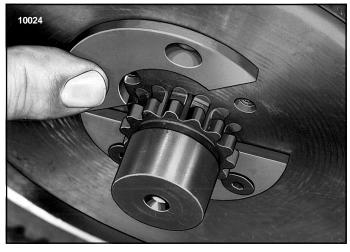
Installing Retainer Plates on Load Brake Shaft
